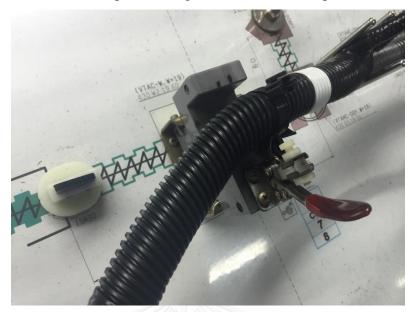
The operator is laying down the wiring harness on inspection 1 board.
